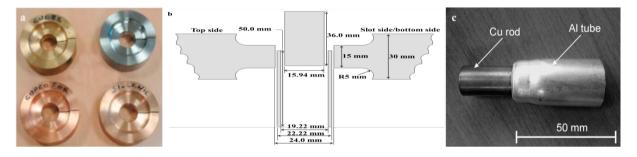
(a) Four different fieldshapers used in the welding process: CuBe2, Steel, Cuprofor, Siclanic (b) cross section of the assembly configuration used for the tests (c) magnetic pulse welded Al/Cu sample
